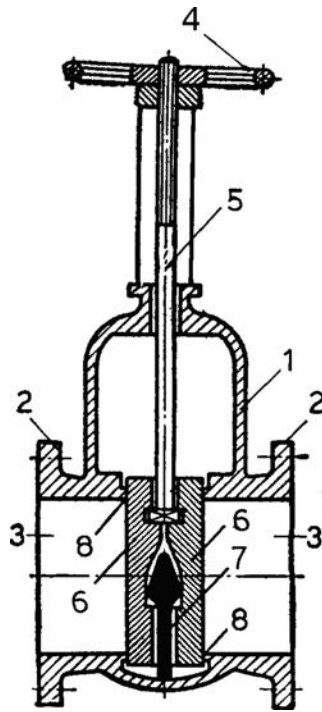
Waterworks valve type. (1) Shell of the valve; (2) flange; (3) pipe joint; (4) steering wheel; (5) valve spindle; (6) disc; (7) wedge; (8) sealing ring.
